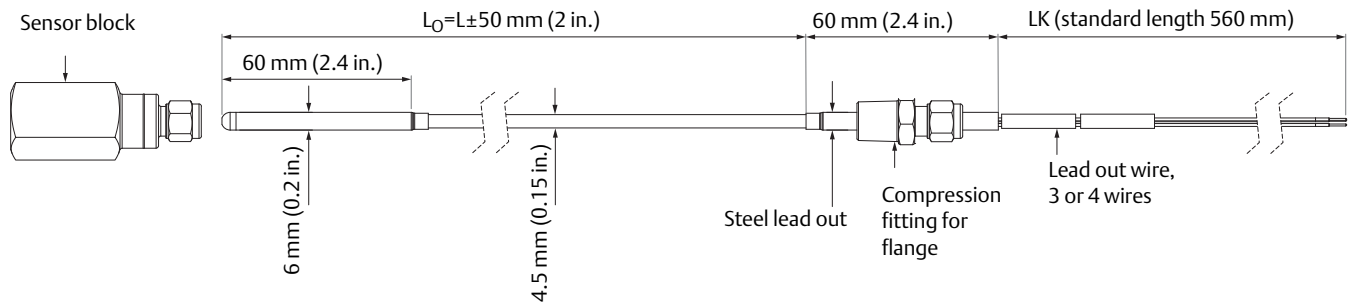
Rosemount 614 Cryogenic Spot Temperature Sensor with Wired Lead Out and Sliding Flange Fitting
